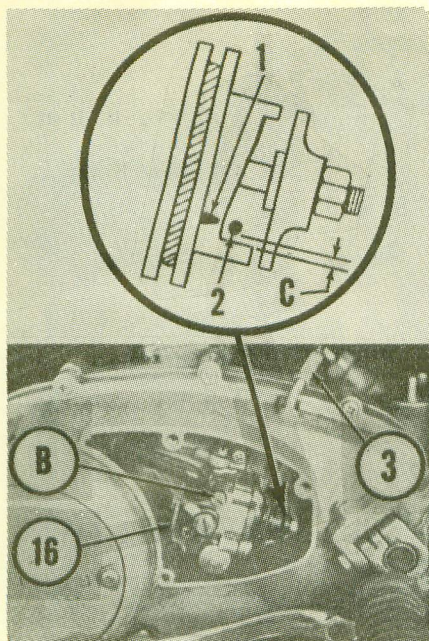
When carburetor controls are correctly adjusted and engine is at idle speed, mark (1) should be aligned with guide pin (2). Cable adjuster is shown at (3). Clearance (C) at idle should be 0.35-0.40MM.
